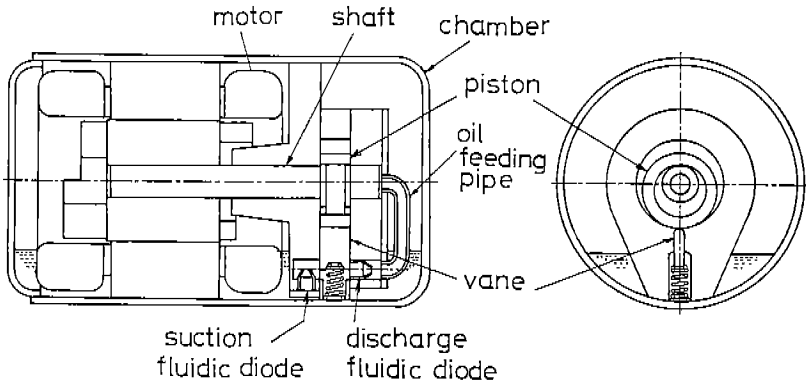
Horizontal Rotary Compressor and Oil Feeder Pump
